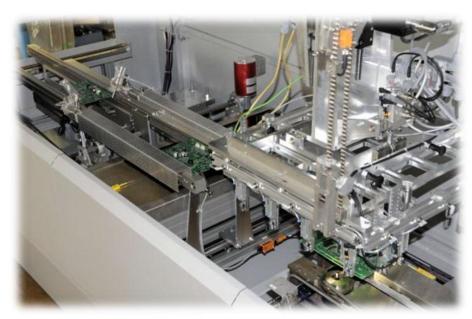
A common type selective soldering machine. Photo courtesy of JUKI.
